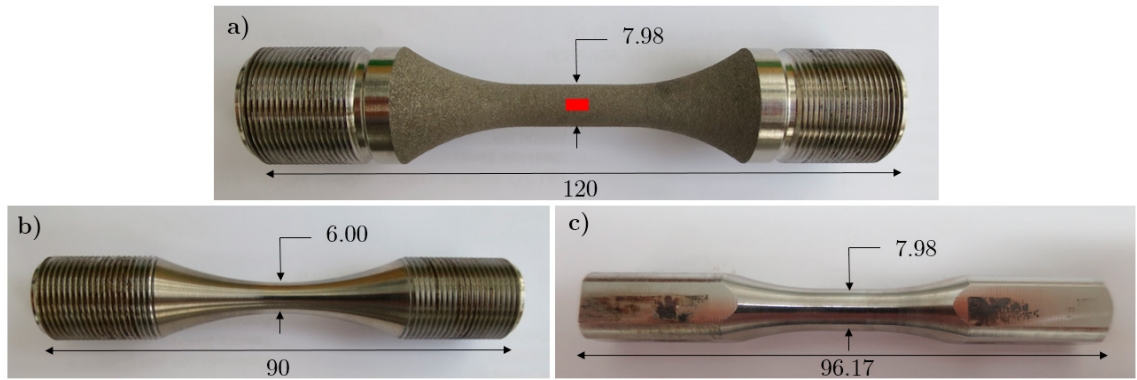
Dimension of the samples used for Fatigue tests. a) SLM and EBM machined and "As-built" used for fully reverse uniaxial tension/compression tests. The red rectangle shows the location of the surface scans; b) HR used for fully reverse uniaxial tension/compression tests; c) SLM machined used for fully reverse torsion tests.
